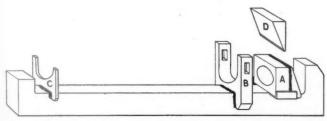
Special jig used in upsetting heated car axle end under a steam hammer
